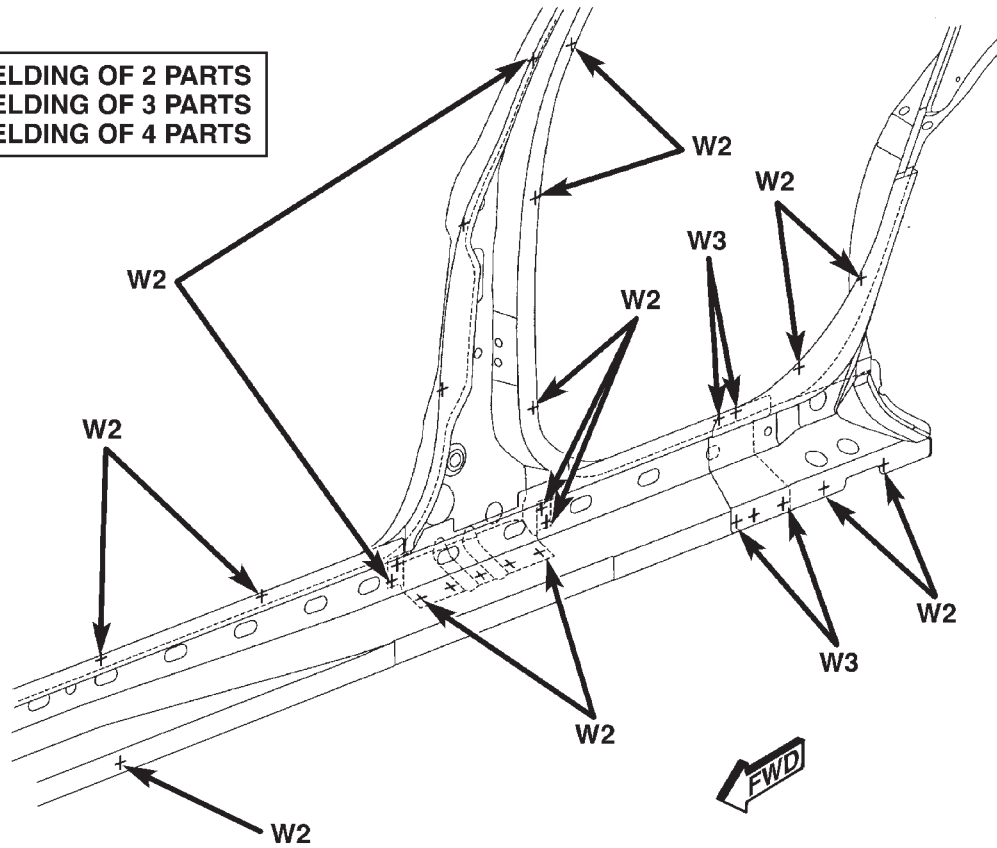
CENTER PILLAR REINFORCEMENT & SILL BEAM REINFORCEMENT TO BODY SIDE APERTURE
